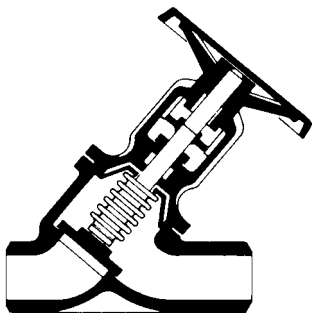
Slanted seat valve with metallic bellows and welding sockets (acc. to ARI-Armaturen)
